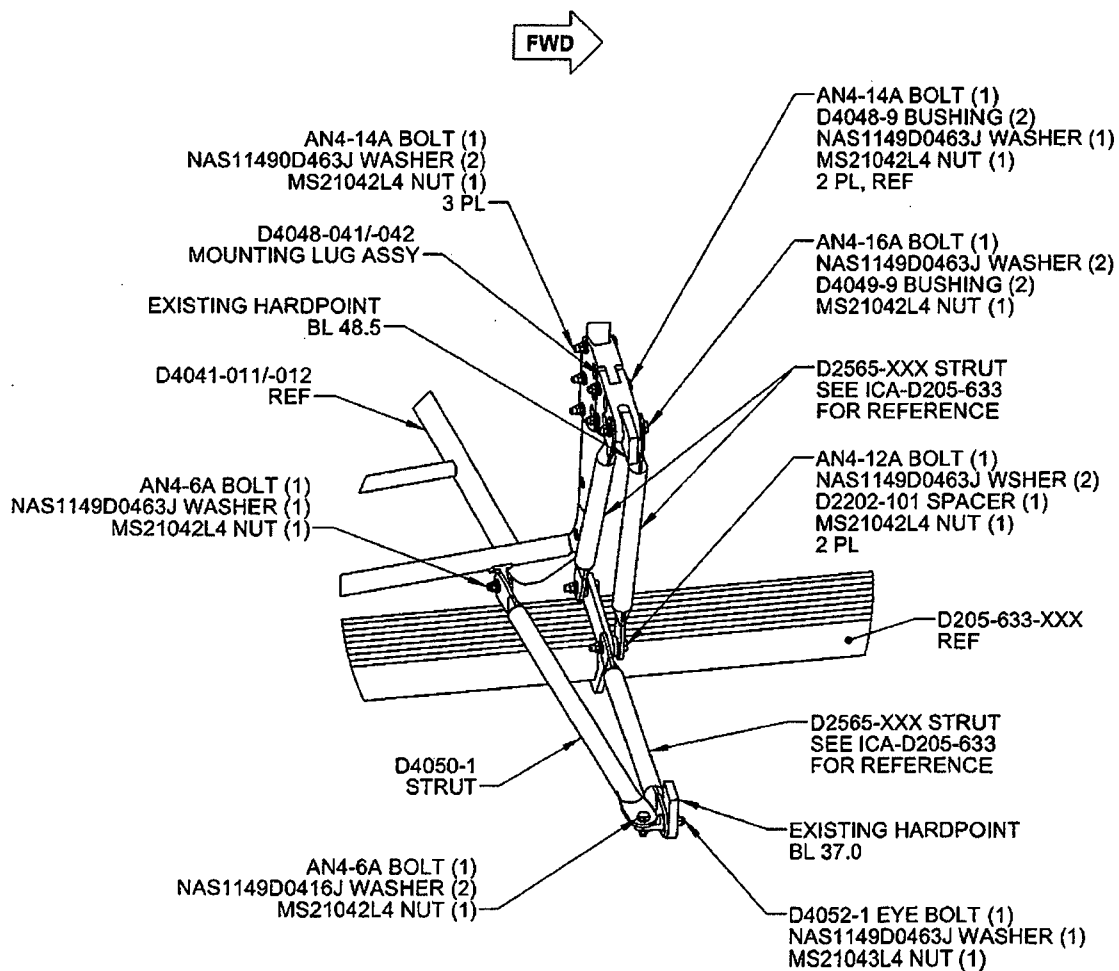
Section K-K (New Hard Point Installation at STA 179.5)
